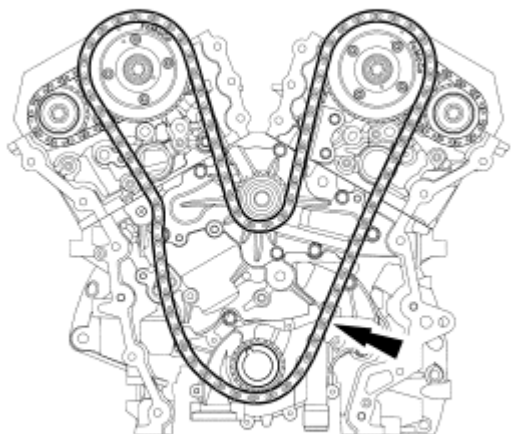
Locating Lower LH Primary Timing Chain Guide Bolts
